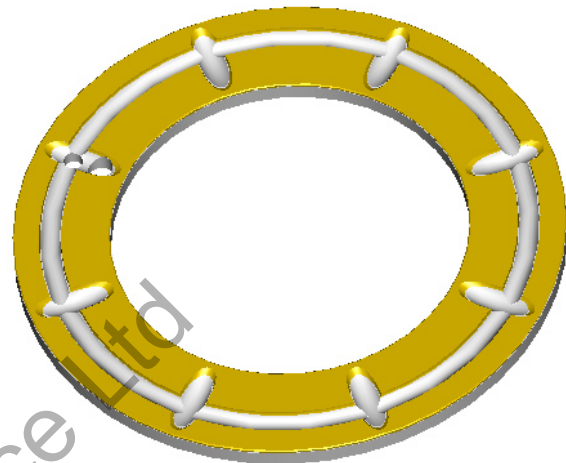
Standard bronze thrust bearing; refer also Figure 31, Page 22
